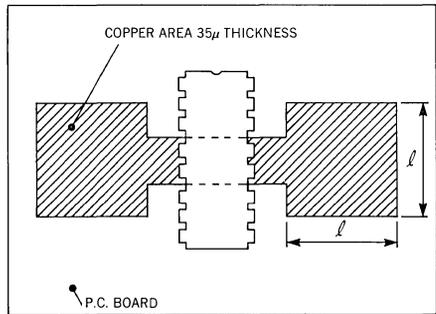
Example of P.C. Board Copper Area which is used as Heatsink
